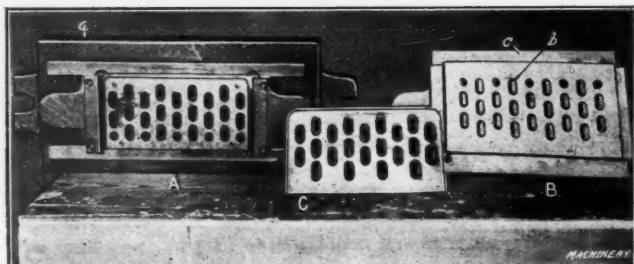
Punch and Die for drawing up Edges of Perforations in Rear Guide Plates
